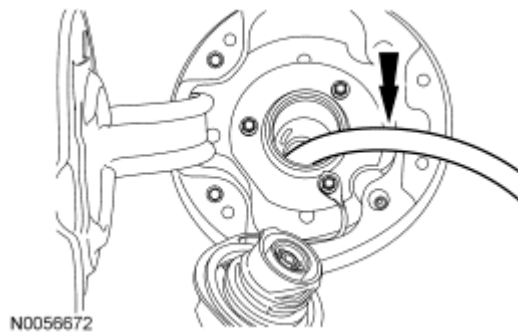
Inserting Suitable Fuel Drain Tube Into Fuel Tank Filler Pipe
